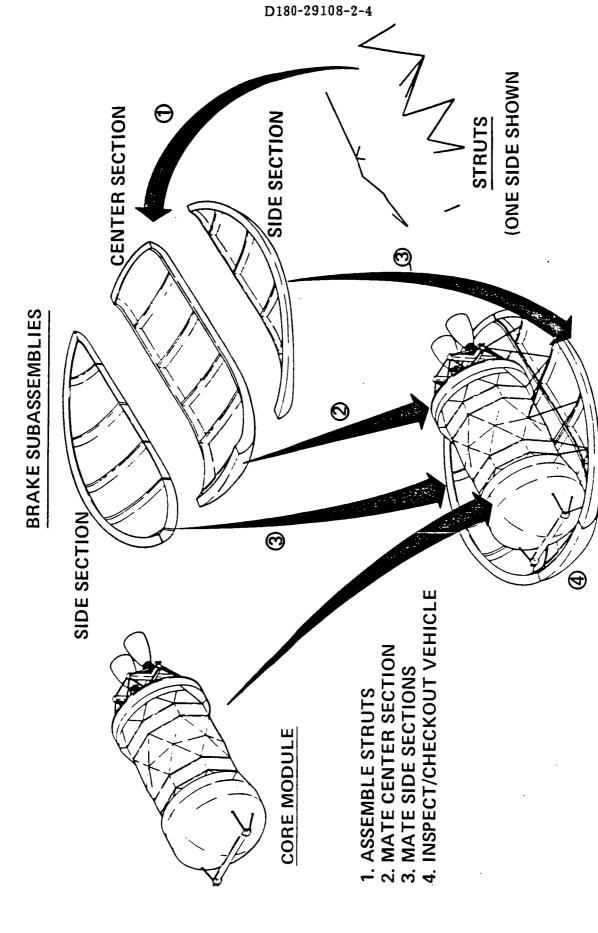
Shaped Brake Assembly Sequence
